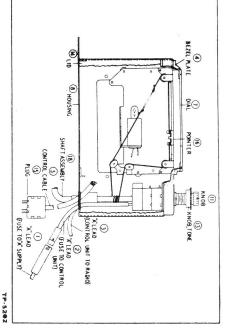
Control Unit C623M (Chrysler), Showing Location of Parts and Dial-Cord Installation Details
